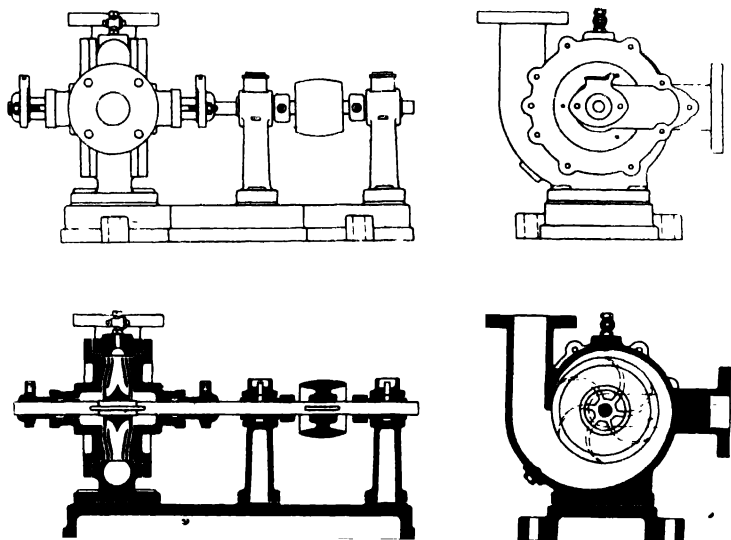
Elevation, End View and Sections of Centrifugal Pump.
